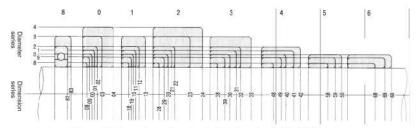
Dimension series of radial bearings (excluding TRB)
